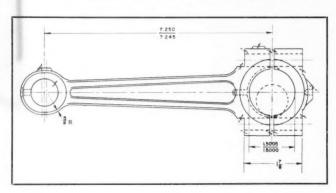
Drawing of a connecting rod which is used on an air compressor
